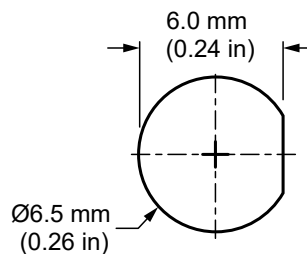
Recommended Mounting Hole Dimensions for the CSB-RGFB-102-UFFR Cable Assembly
